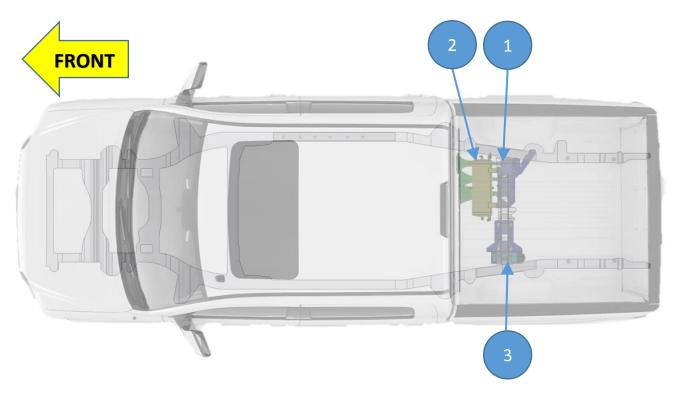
Figure A - Top View Showing Kit Layout (2018 Tundra Crew Cab Shown)
